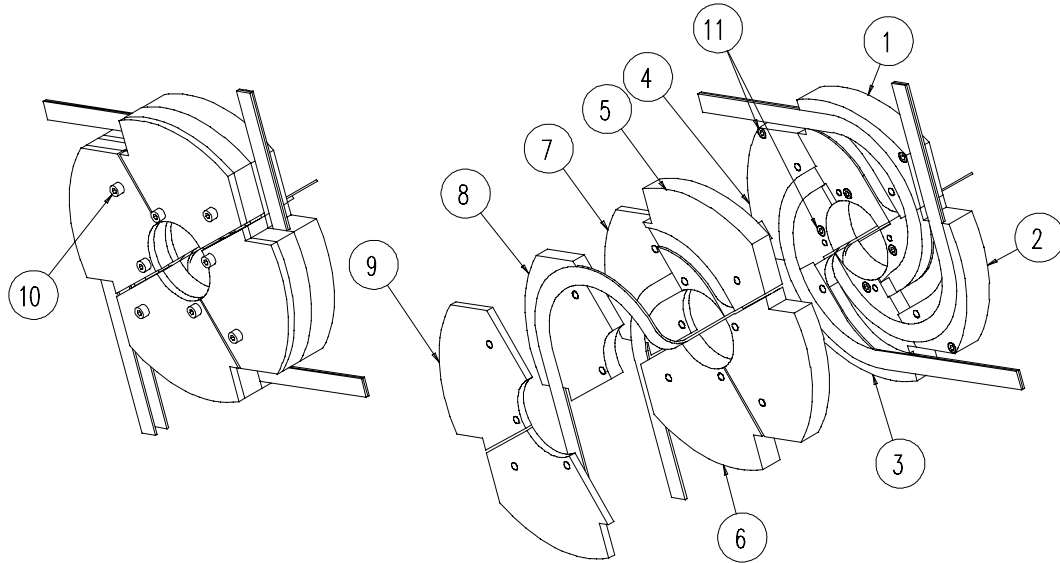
End view of quadrant splice and power lead assembly:
